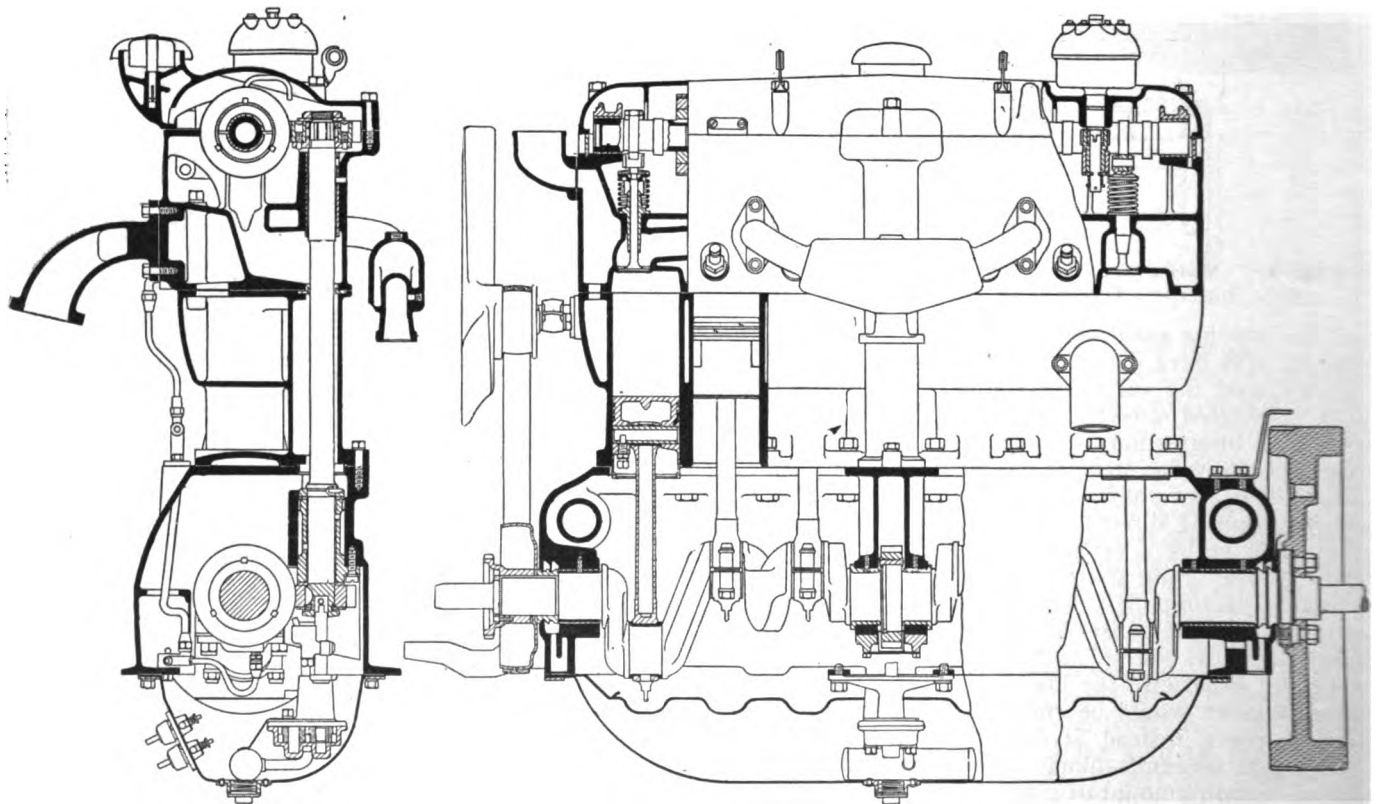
General Arrangements of the Chalmers Engine, Showing the Method of Actuating the Cam Shaft. So Far As We Are Aware Only One Other American Engine Has Yet Adopted This System of Valve Operation
